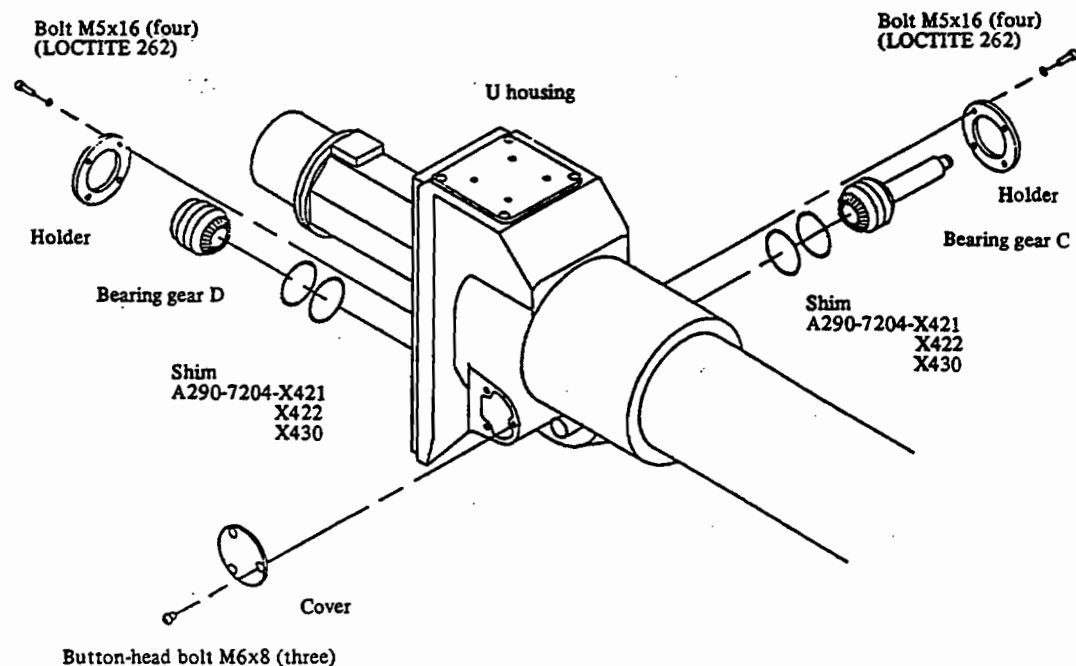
Adjusting U-axis bevel gear backlash (S-10)
